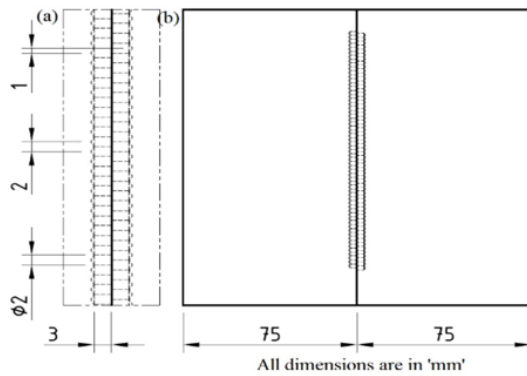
Schematic diagram of FSW in detail a) enlarged view of zig-zag hole position, b) schematic diagram of weld specimen
